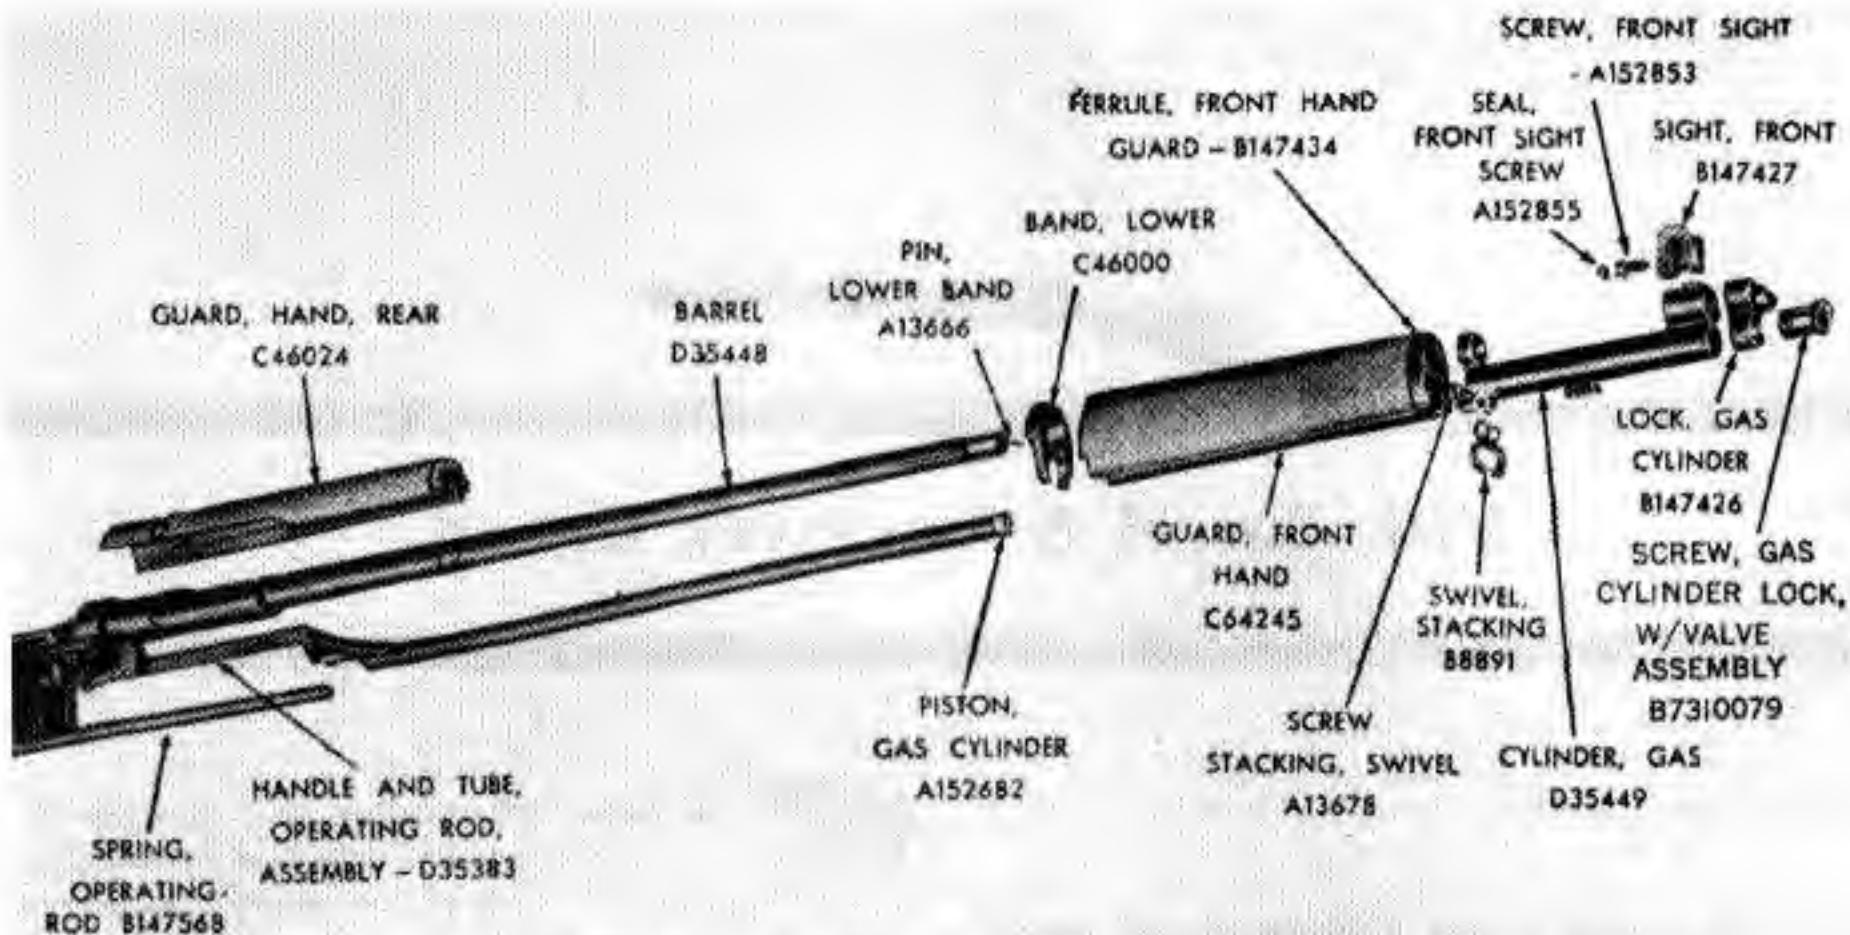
Barrel, with gas cylinder (spline type), hand guards, and operating rod assembly.
